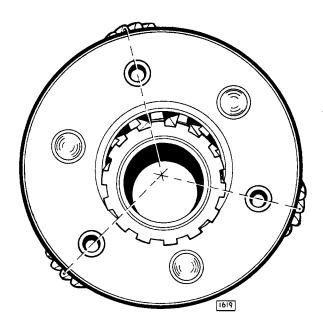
Assembling the planet gears—Note the positions of the marked teeth
